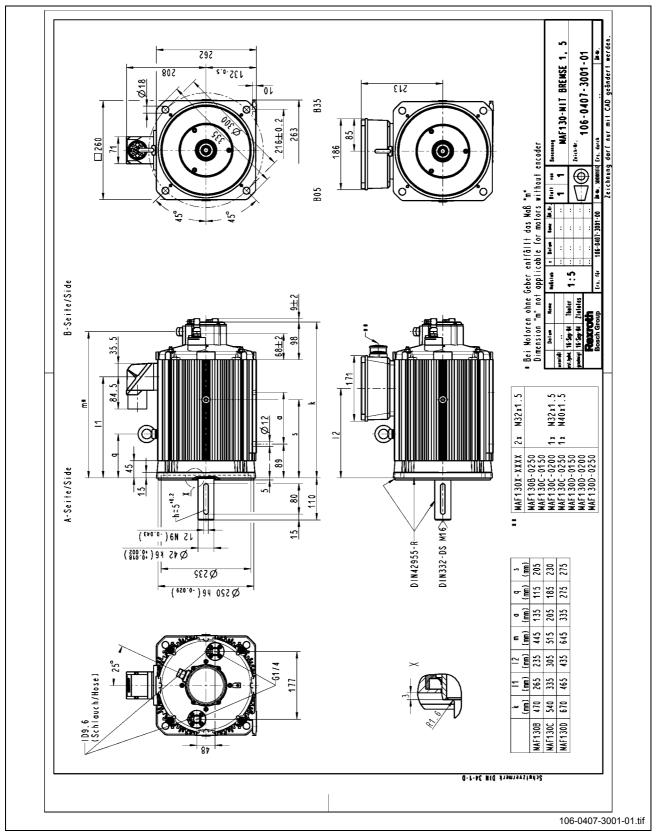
Dimension sheet for MAF130, with brakes 1 and 5
